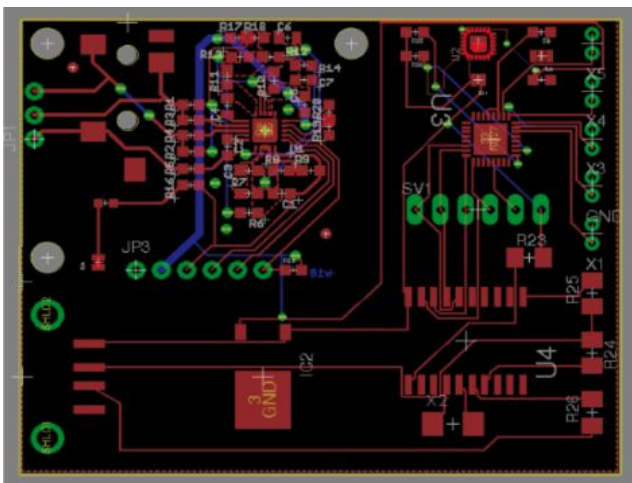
Final PCB for Technology of Soldier Support      Fig. 2 - Hand Gesture Recognition Module
